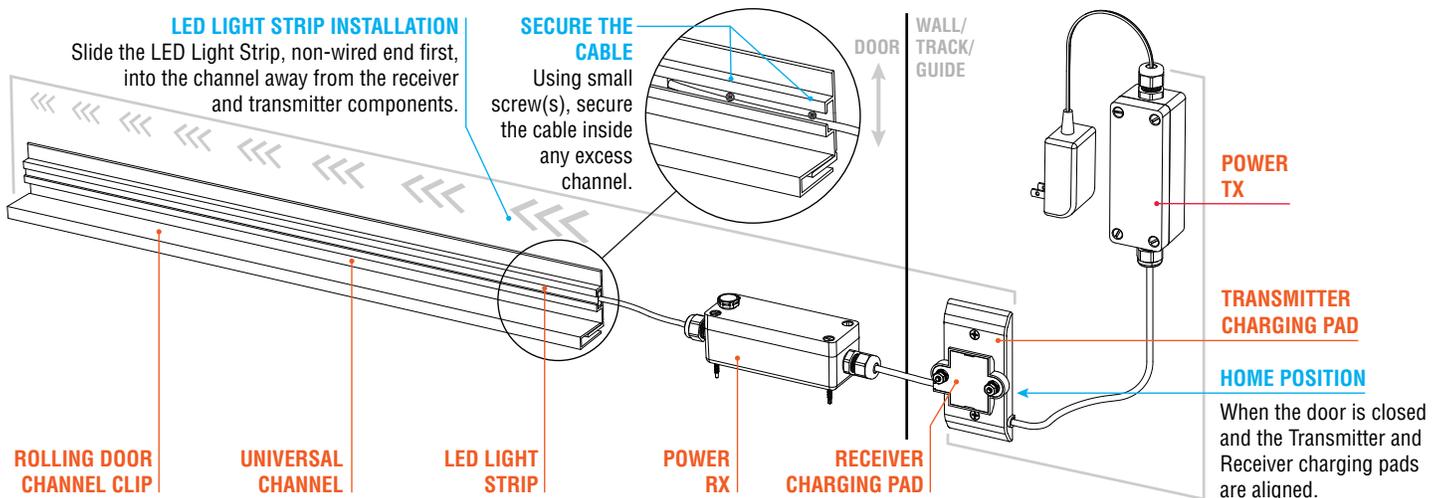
Component Detail (Door and Brackets Not Shown)
